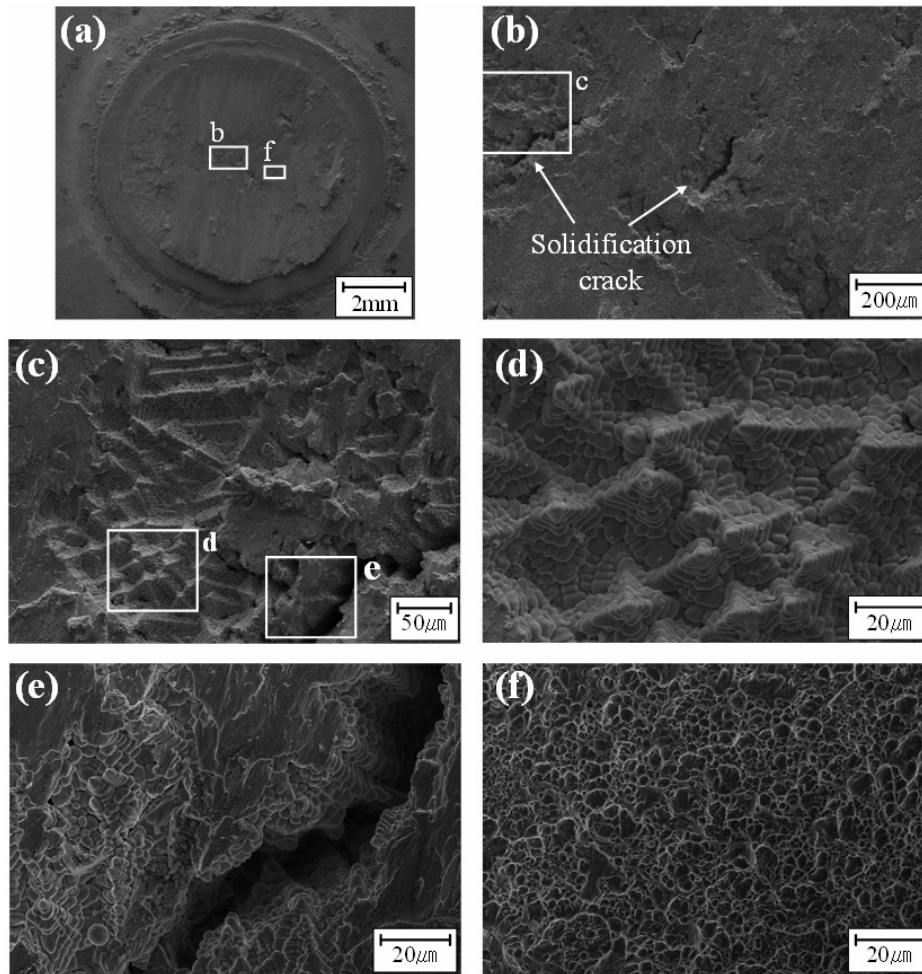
SEM images of the fractured weld zone (a) Overall view of the fractured weld zone; (b) and (c) higher magnification view of the weld; (d) dendrites; (e) magnified image of solidification crack and shrinkage; (f) ductile fracture characteristics (dimple).
